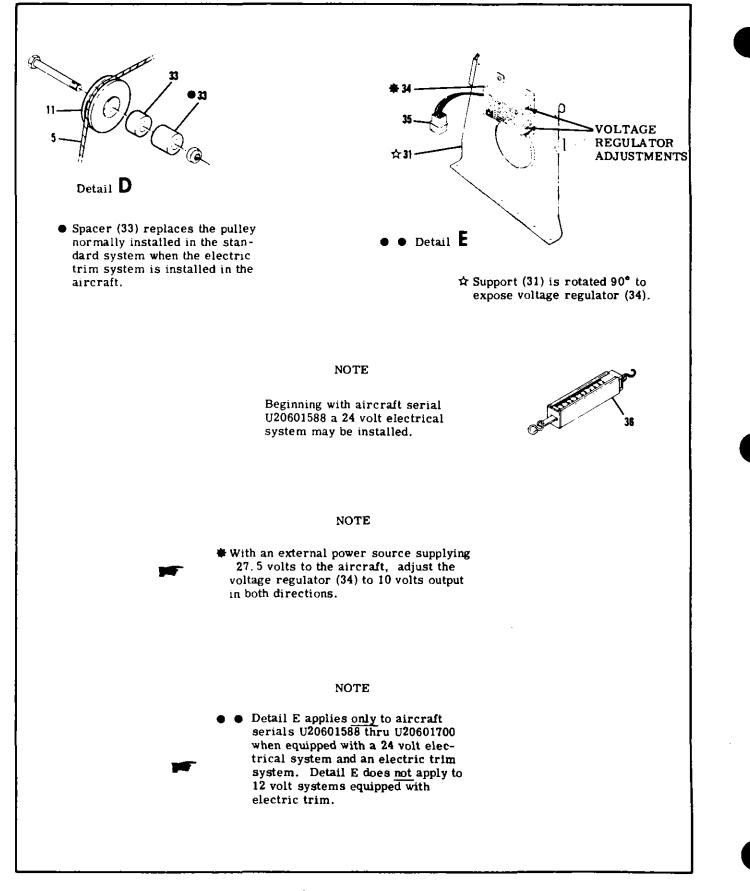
Electric Elevator Trim System thru P20600648 & U20601700 (Sheet 2 of 2)
